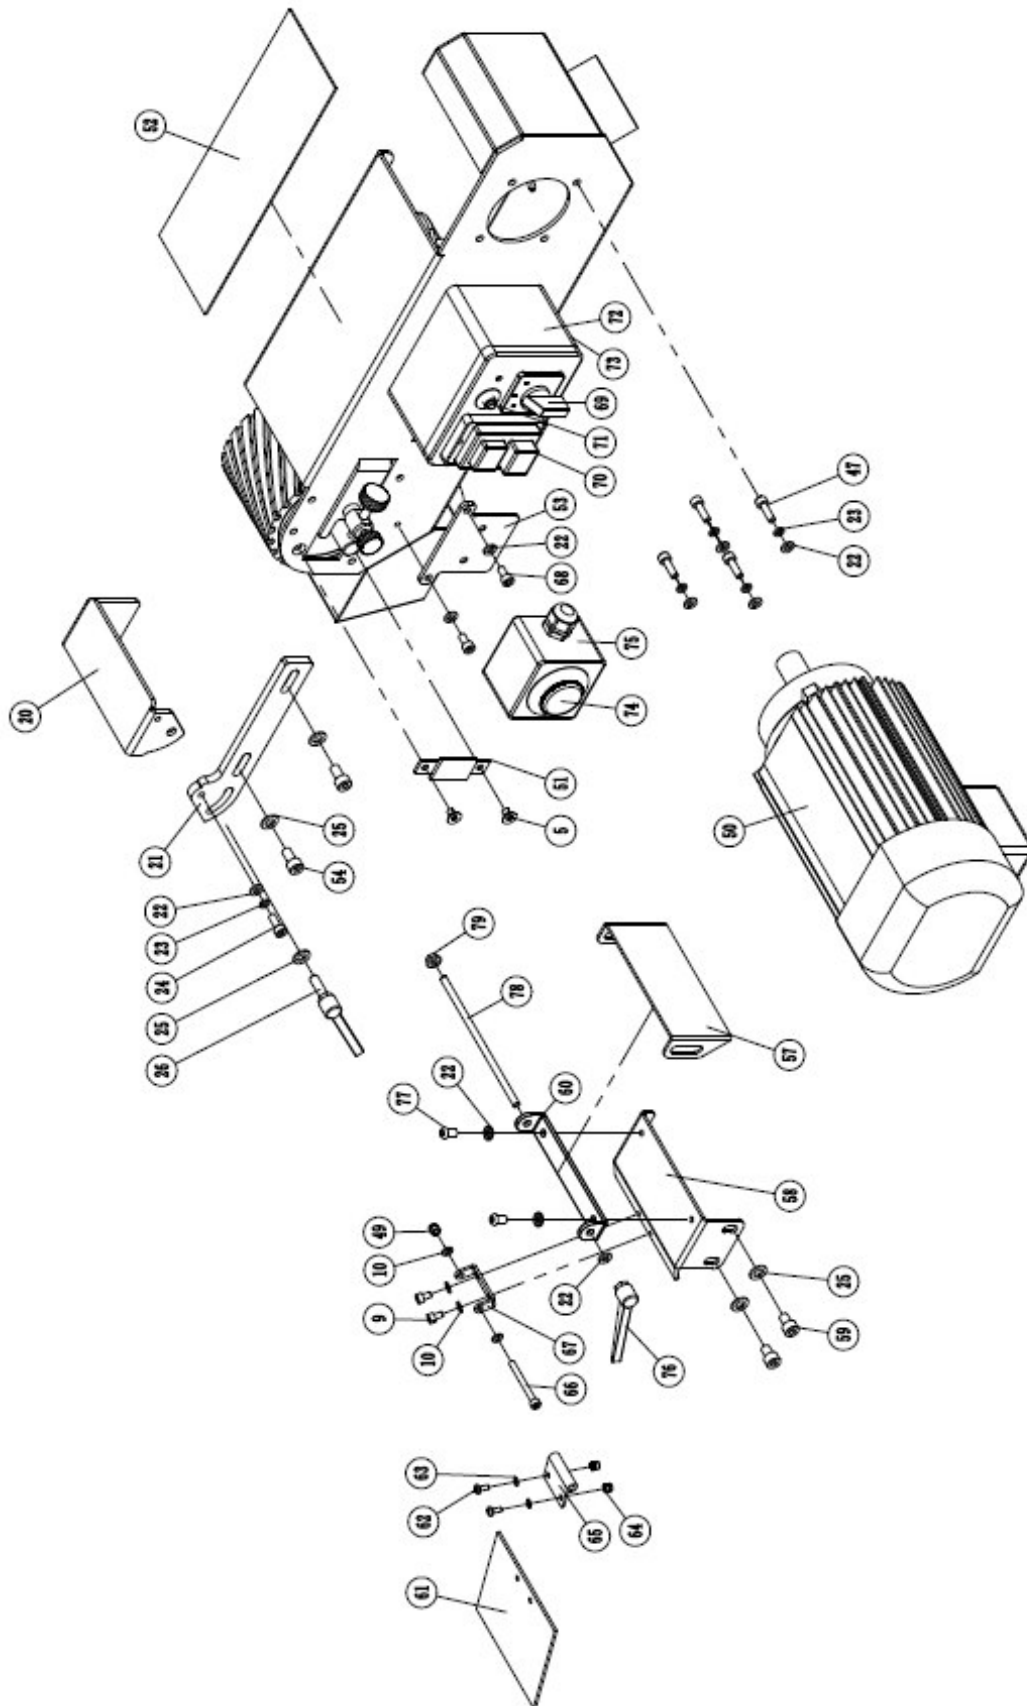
Spare parts drawing 3 MBSM 75-240-2 AS/400V, MBSM 150-240-2 AS/400V
